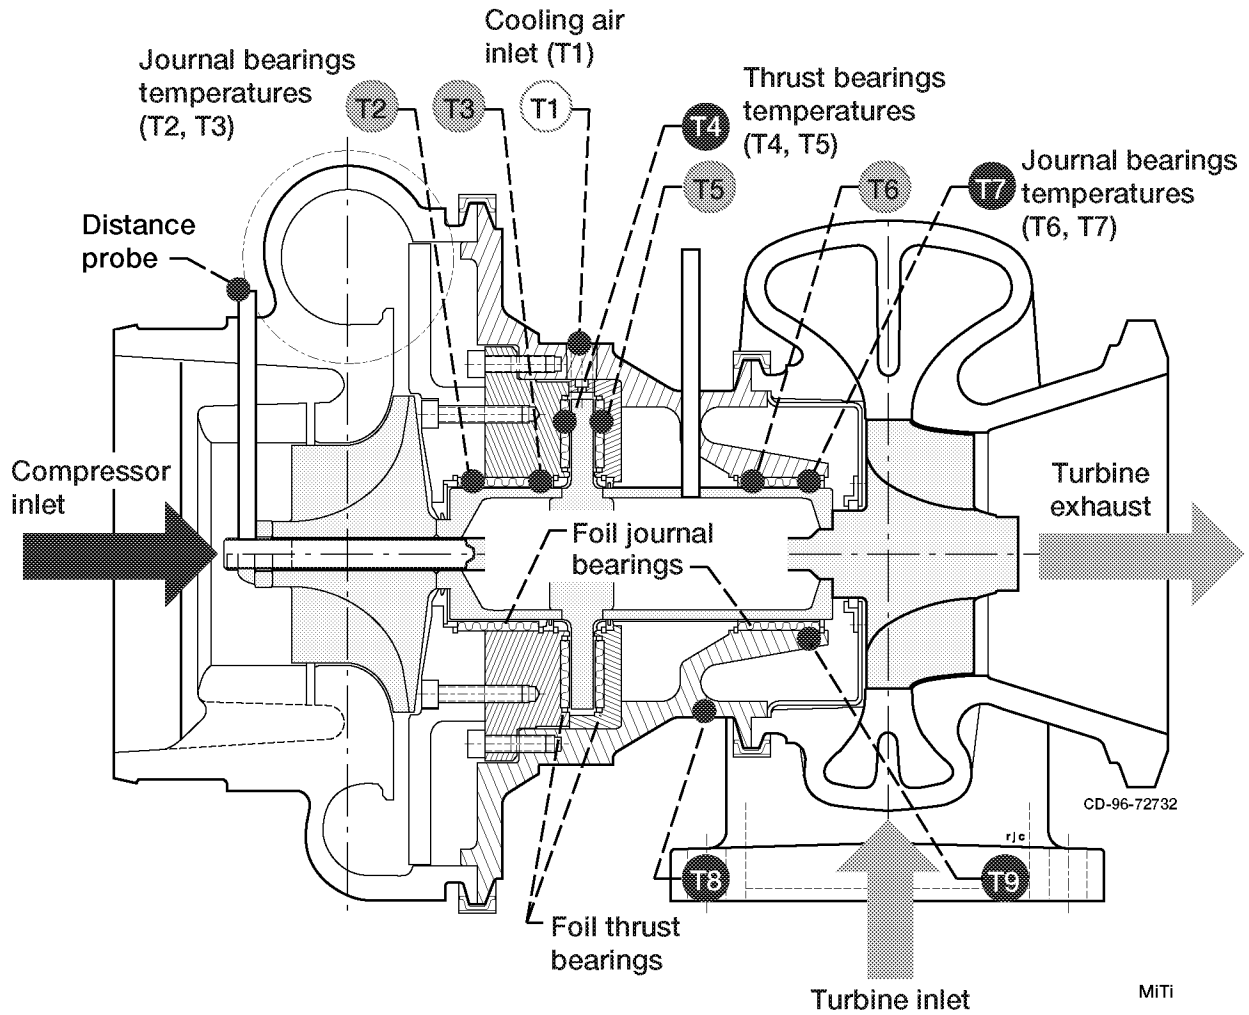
Oil-free turbocharger showing location of journal and thrust foil bearings and thermocouples.
